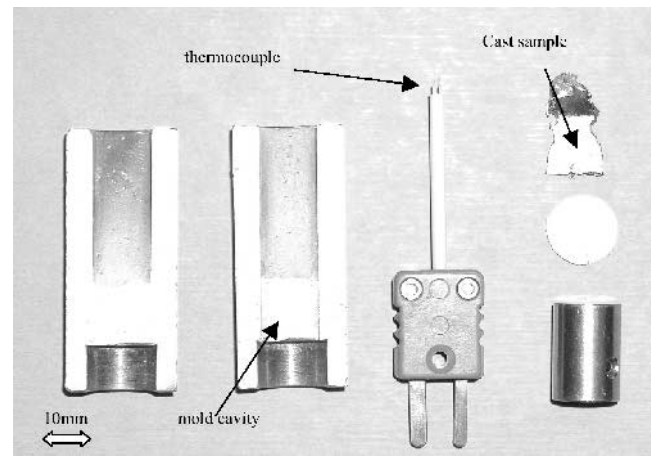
Photograph of the disassembled levitation mold including the thermocouple and a cast sample.
